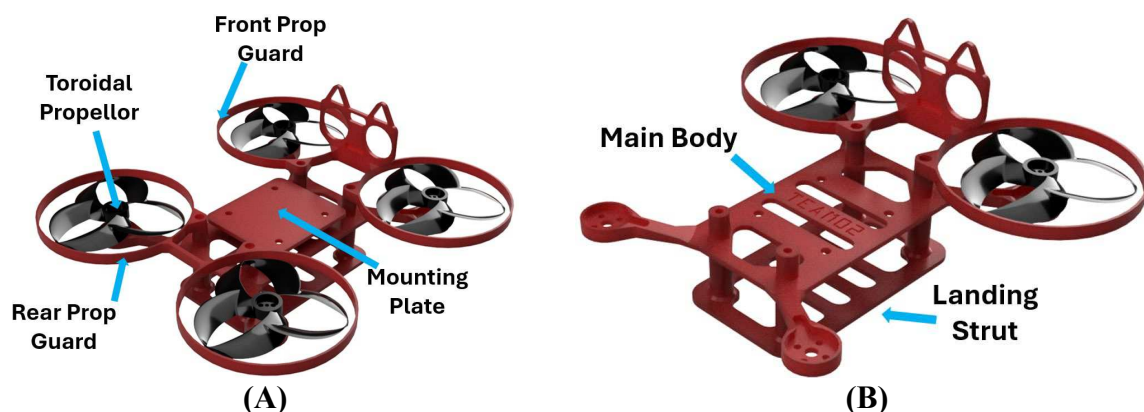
(A) Assembled Frame. (B) Frame with Mounting Plate and Rear Components Removed
